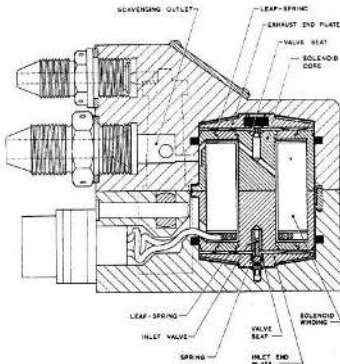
Sectional view of electro-pneumatic valve (AC1010)
